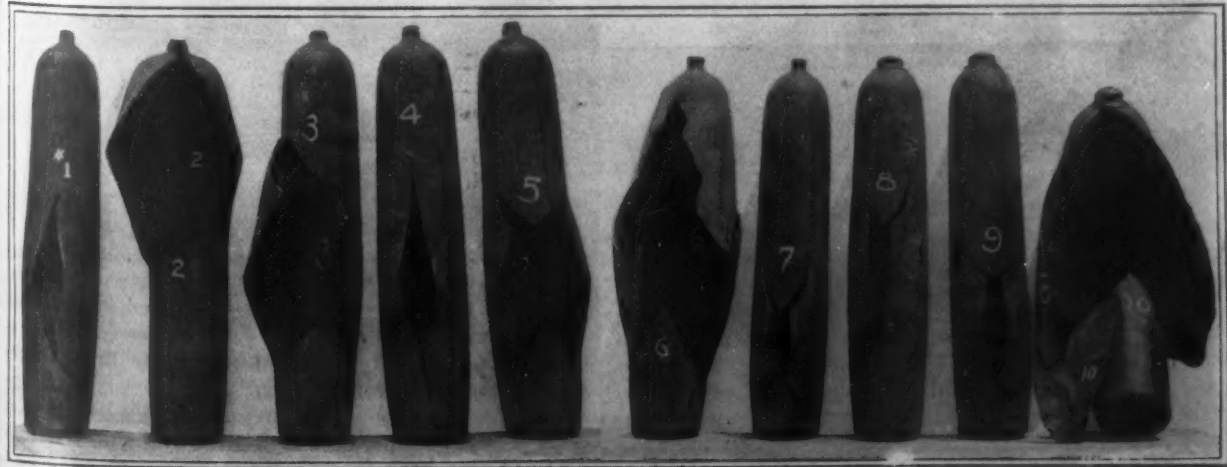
Low Carbon Steel Air Flasks Tested to Destruction.
